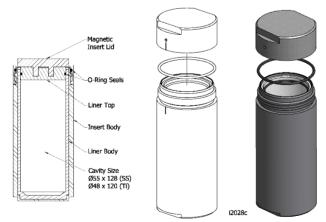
Shielding insert HS-55x128-SS with Titanium liner – Design # 3987
